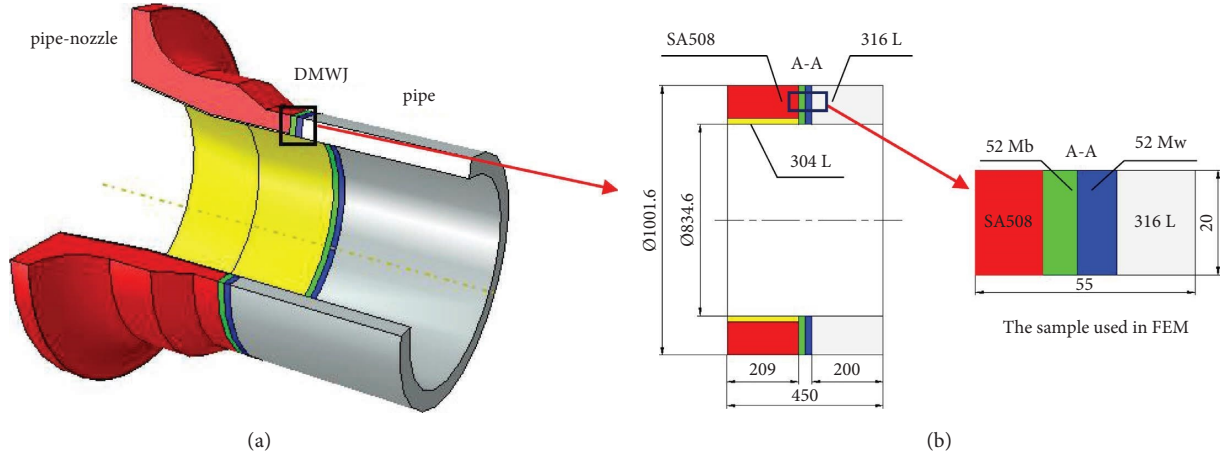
Dissimilar metal welded joint (DMWJ). (a) Typical dissimilar welded joint. (b) Four materials constituting the DMWJ and sample used in FEM.
